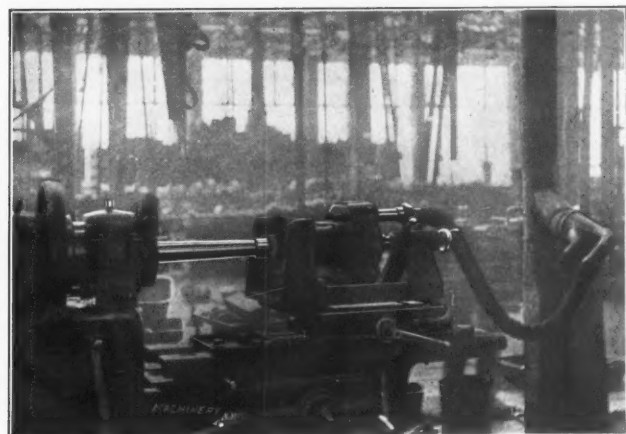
Grinding the Cylinders—The Hose to the Right is for Carrying away the Dust
